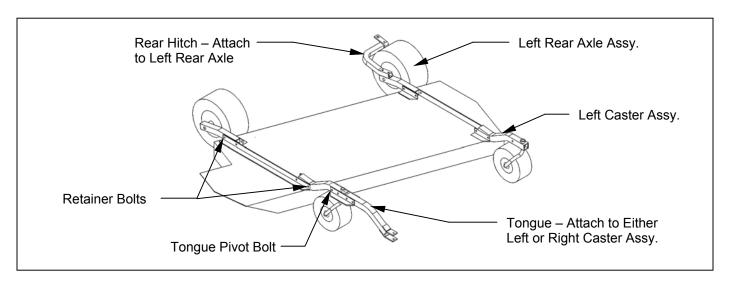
Assembly of Wheels, Tongue and Rear Hitch
